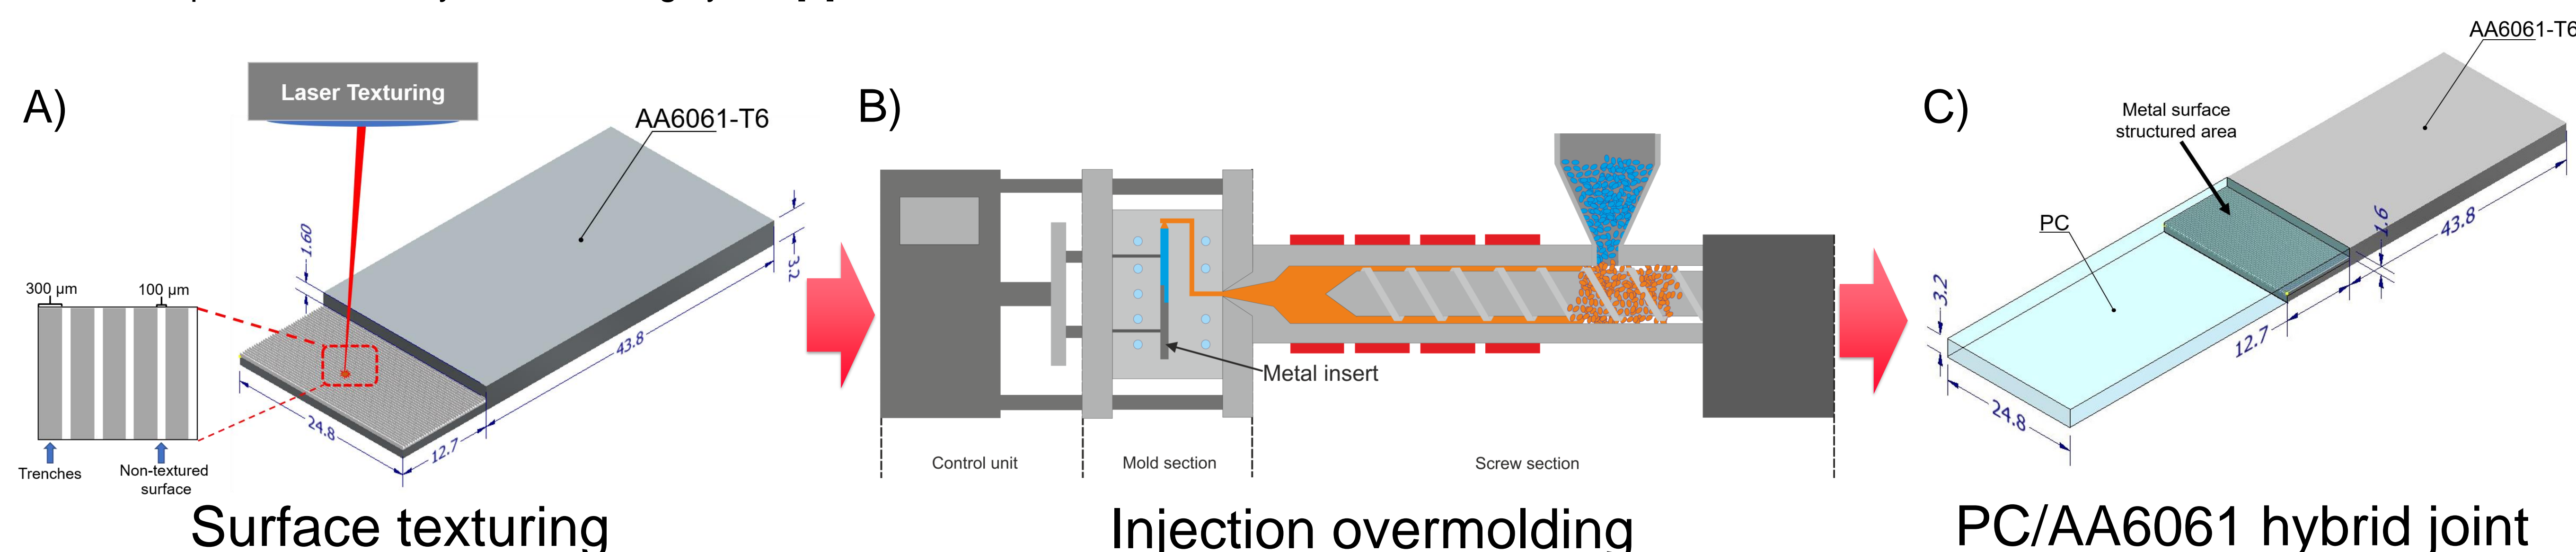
Laser texturing and joining process via injection overmoulding. A) Metal insert and texture dimensions; B) Injection overmoulding process, textured insert positioned inside injection machine mould; C) Dimensions of PC/AA6061 hybrid joint
